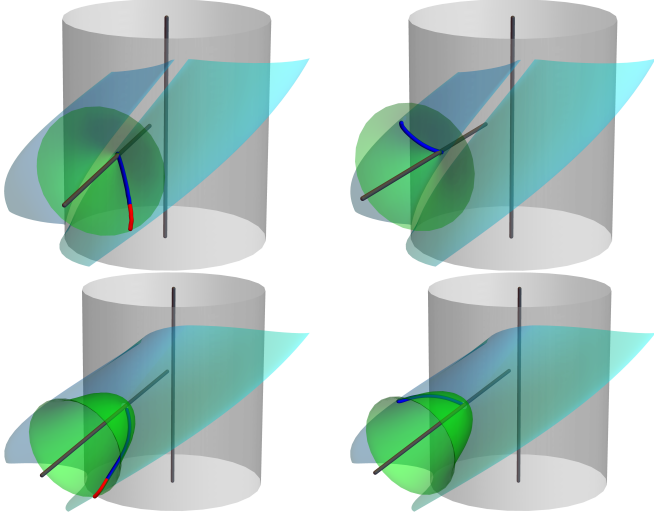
Design of the custom-shape tool for the approximate single-flank milling with the same tool of two helical surfaces (left and right) of male (top) and female (bottom) screw rotors ('N' profile, Stosic, 1996) from Example 4.9.
